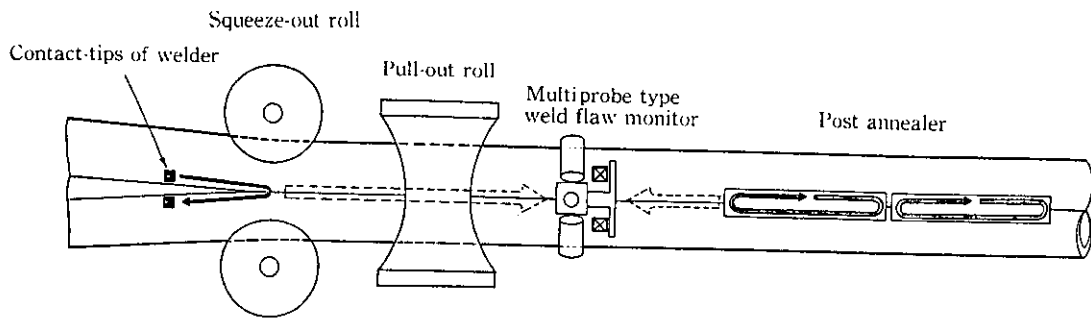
Layout of multiprobe type weld flaw monitor
